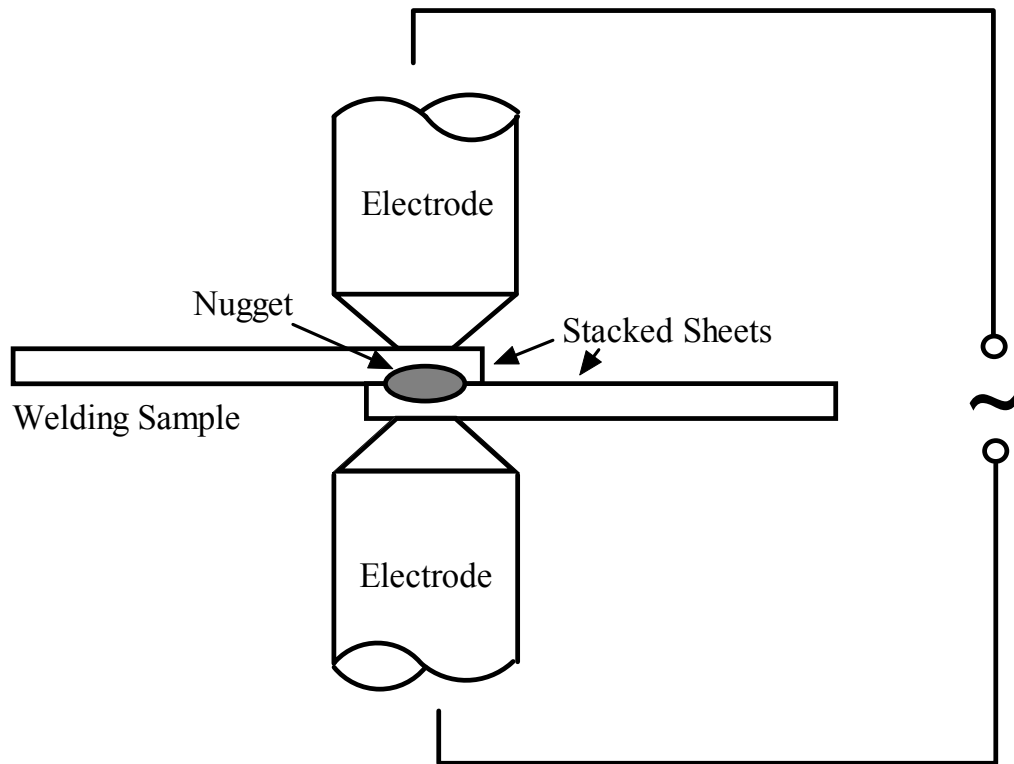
Schematic illustration of resistance spot welding
